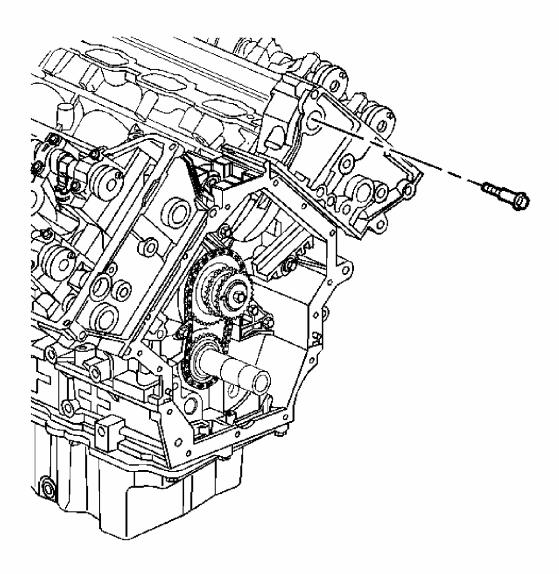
Identifying Left Secondary Camshaft Drive Chain Shoe Bolt Courtesy of GENERAL MOTORS CORP.
